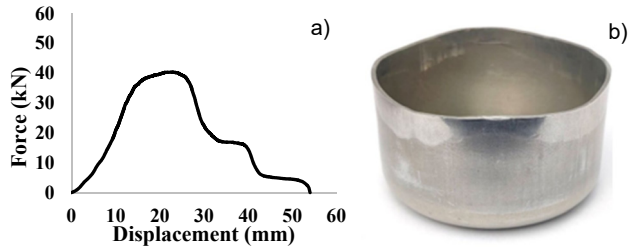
Cup drawing process, a) force-displacement curve, b) experimental sample [23].
